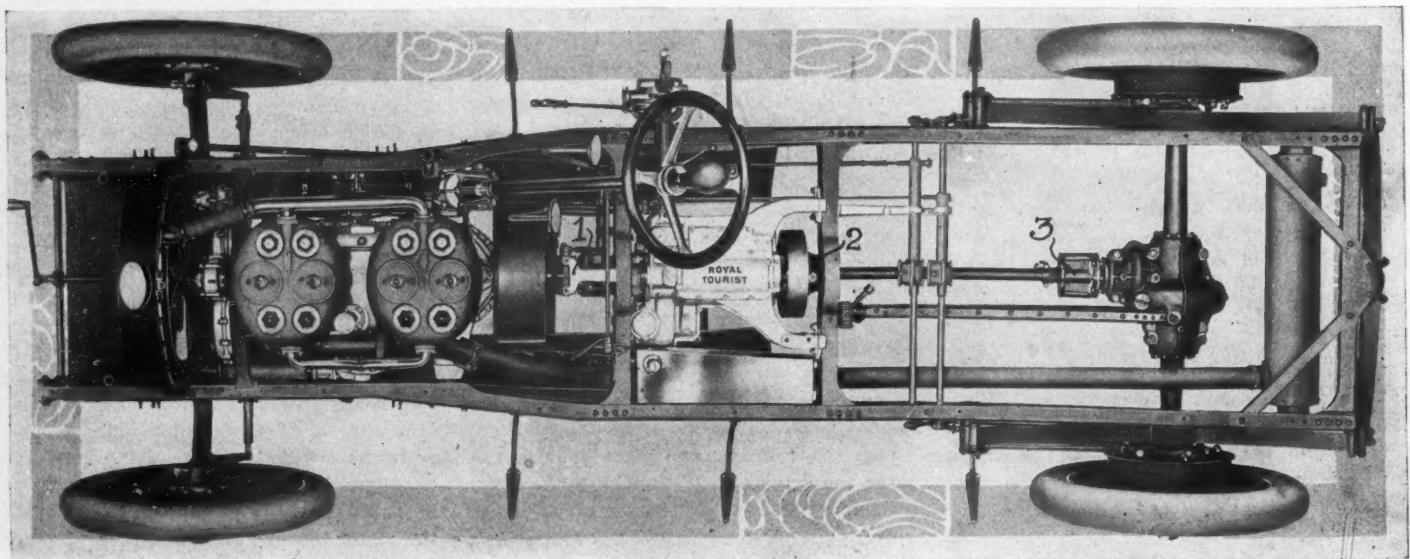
CHASSIS IN WHICH THE GEARBOX IS A SEPARATE UNIT—1, 2 AND 3 UNIVERSAL JOINTS.
